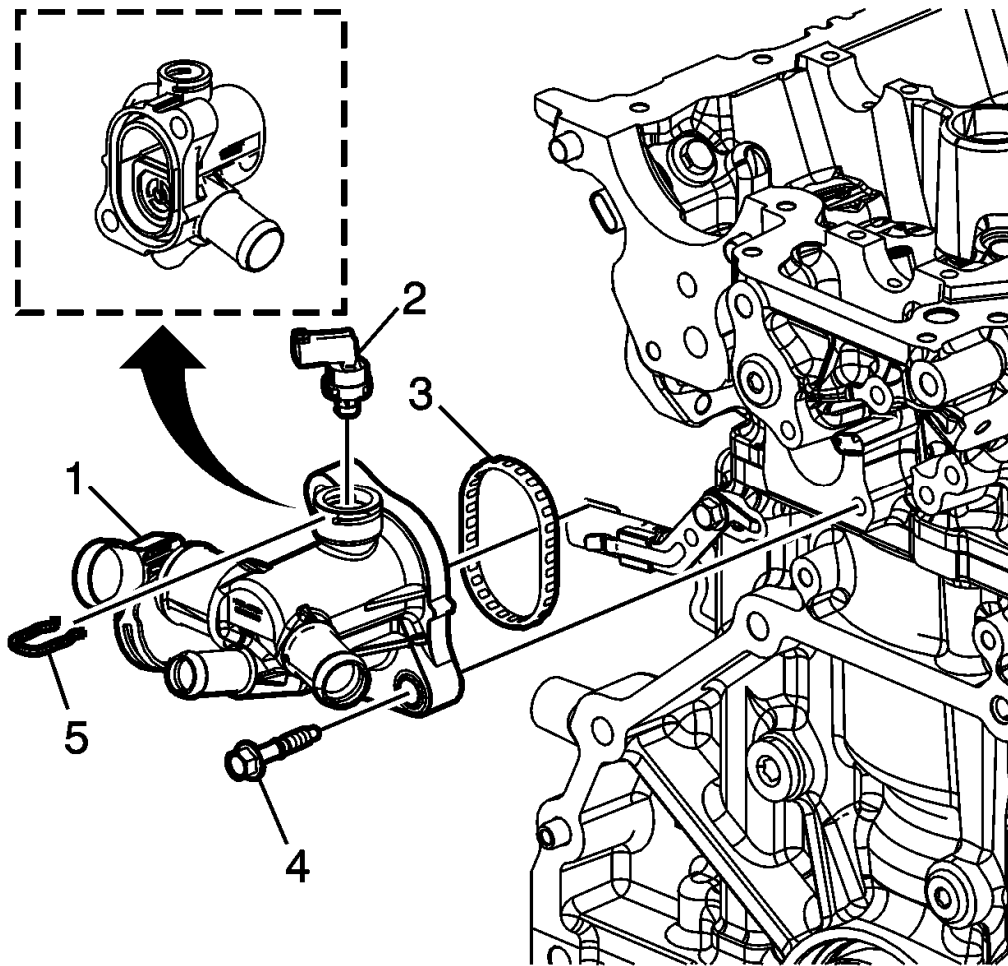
Retaining Clip And Engine Coolant Temperature Sensor
